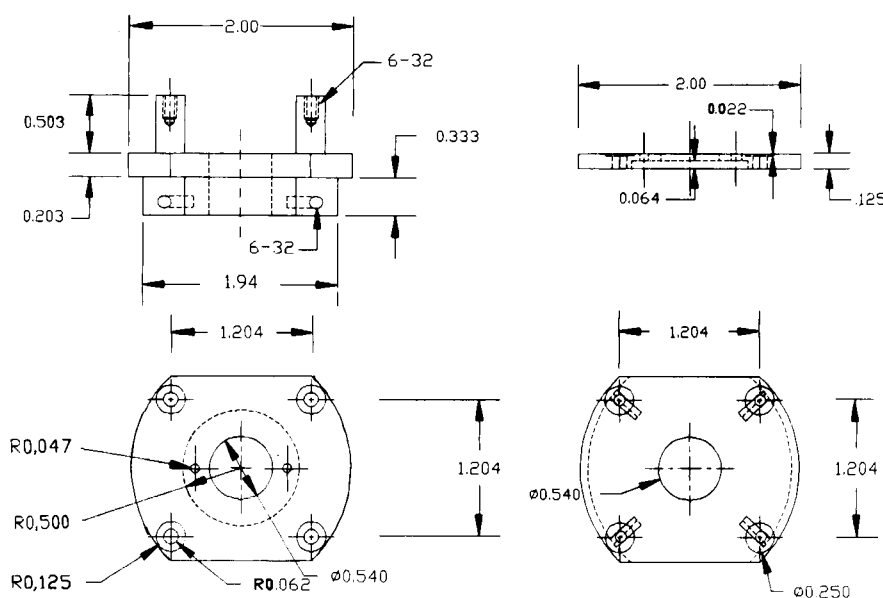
Mechanical drawing showing dimensions of the aluminum source block (upper and lower left) and the PTFE extraction lens holder (upper and lower right). All dimensions are in inches. Radii measurements are preceded by the letter R, diameter measurements are preceded by the symbol Ø.
